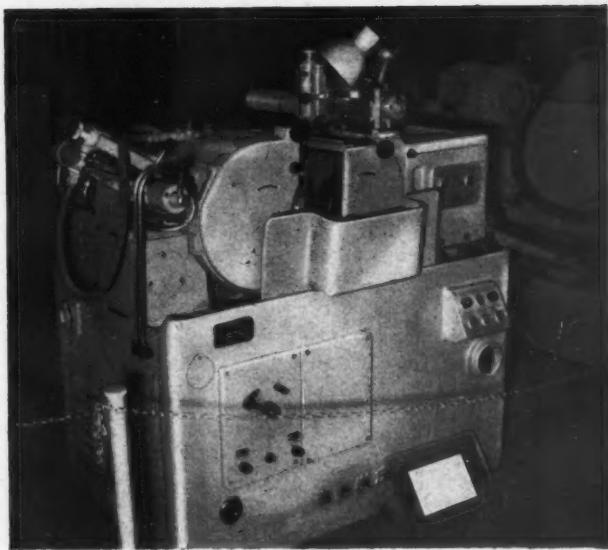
Internal grinding of workpieces is performed automatically in this type M 205 Z1, machine, in which the parts from a magazine are loaded into chucks on spindles in a 3-position indexing drum and automatically discharged after the completion of grinding
